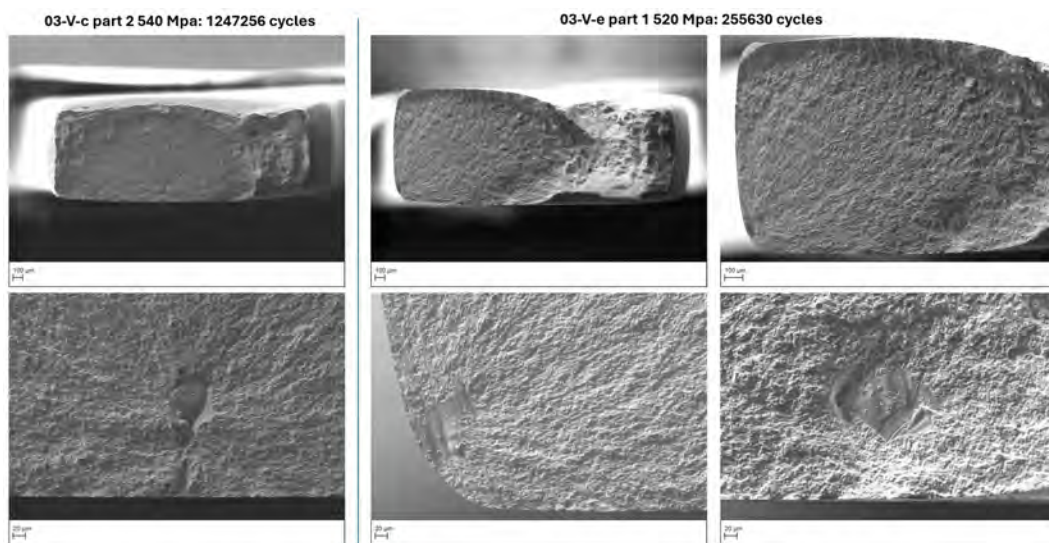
SEM fracture surfaces of vertically built LPBF UNS S32760 HCF specimens. The figure reports representative fracture surfaces of specimen 03-V-c, tested at 540 MPa and failed after 1247256 cycles, and specimen 03-V-e, tested at 520 MPa and failed after 255630 cycles. The images show both the macroscopic fracture morphology and local defect-related features, indicating that fatigue crack initiation was strongly affected by the presence, size and location of process-induced defects.
